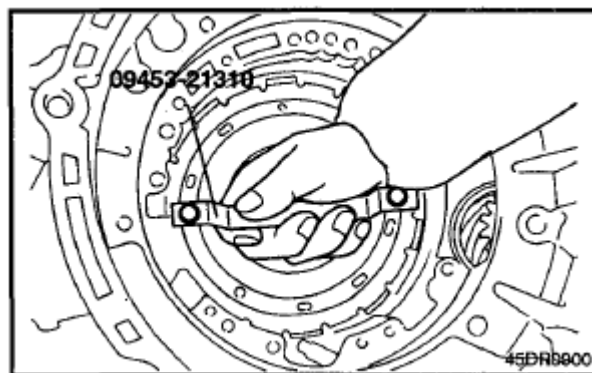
Attaching Special Tool (09453-21310) On Center Support
